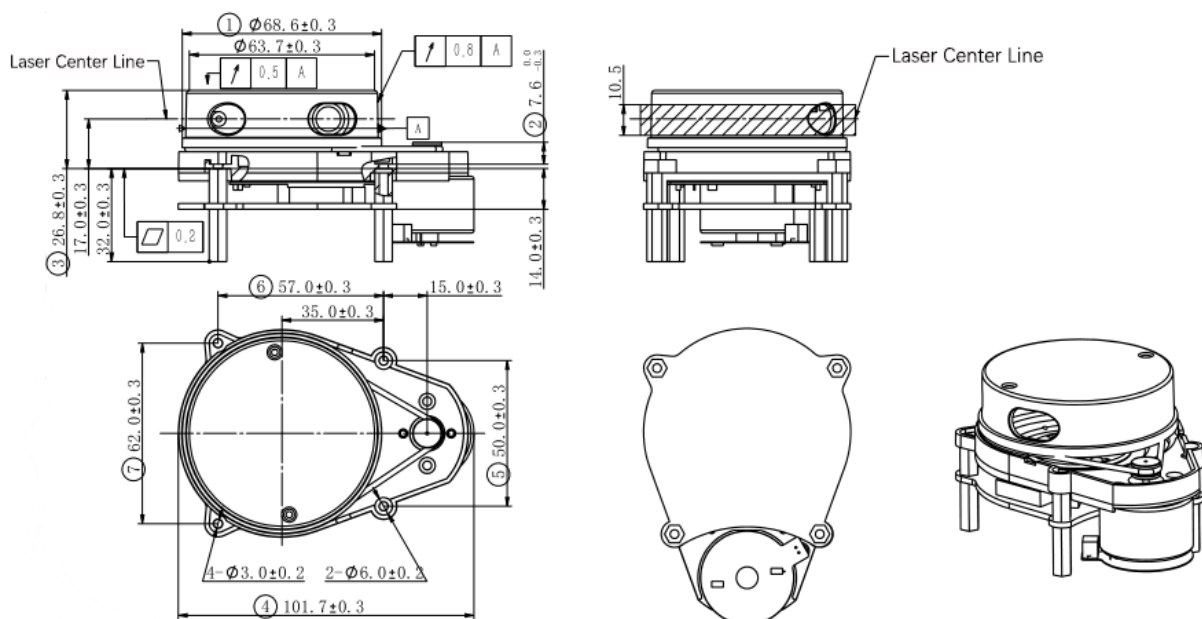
YDLIDAR X4 INSTALLATION AND MECHANICAL DIMENSIONS (UNIT:MM)
